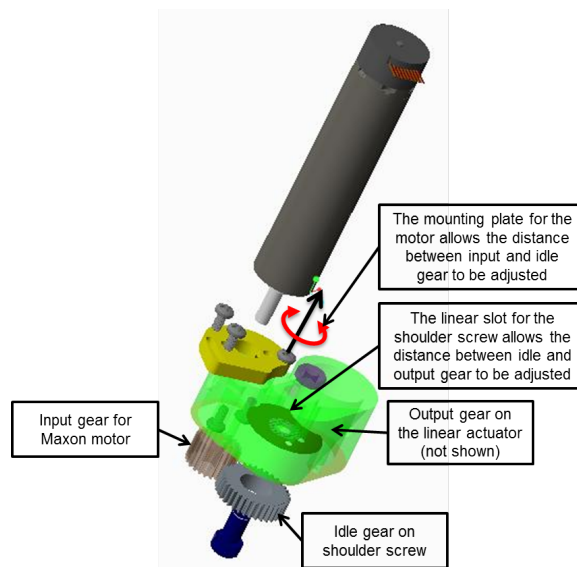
The input gear from the motor and output gear on the linear actuator has a gear ratio of 1:1 to allow the maximum possible output torque. The distance between the gears could all be adjusted as shown in the figure.
